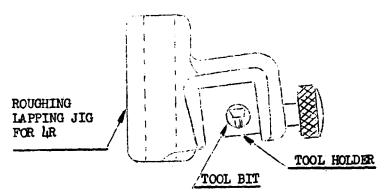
LAPPING JIG FOR LAPPING ROUGH BORING TOOL BIT IN POSITION 4R
